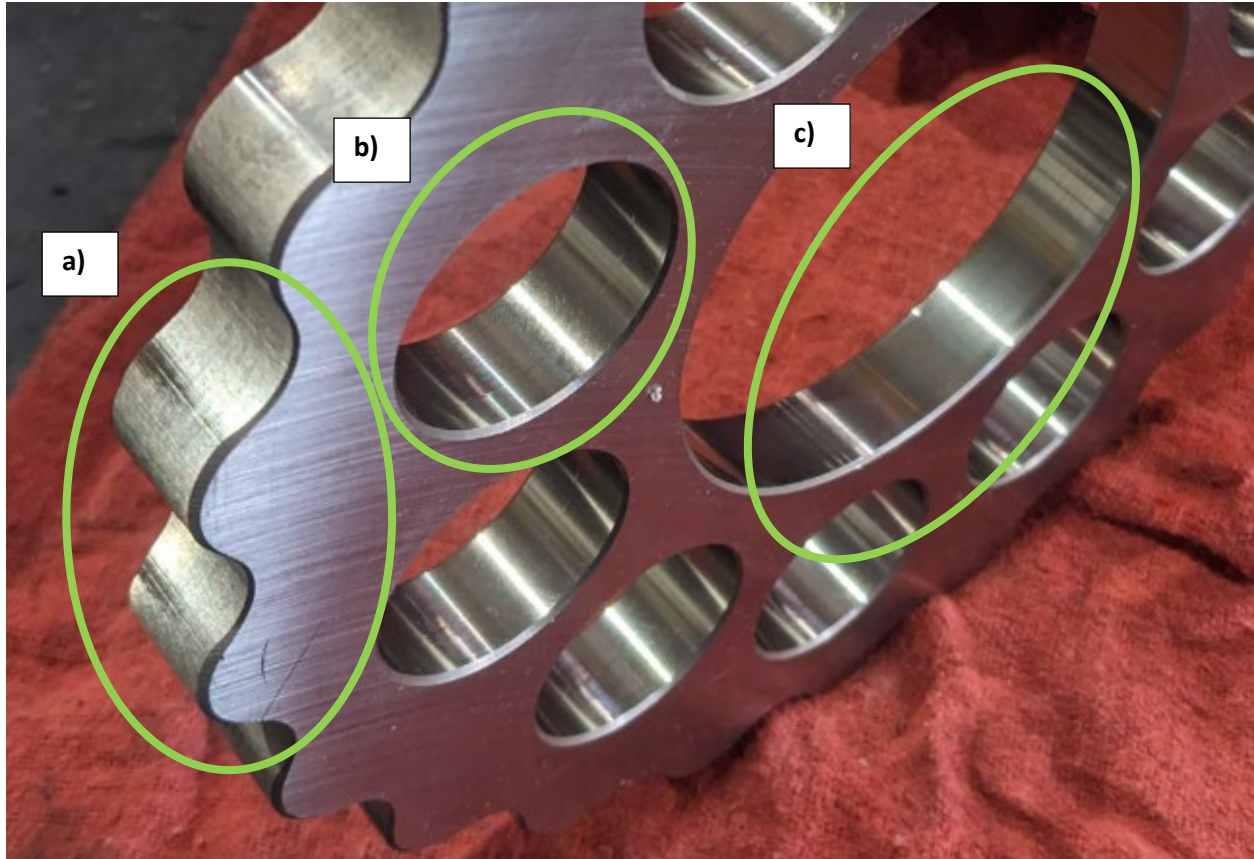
Condition of the Cyclo discs. a) Cyclo discs' lobes show mild polishing. b) Low speed shaft pin's contact surfaces' and c) eccentric bearing's outer race both show mild abrasion.
